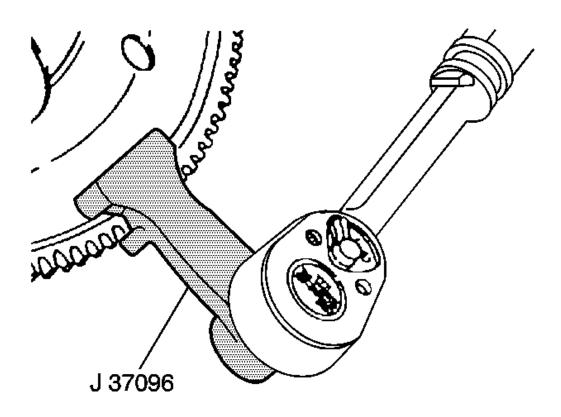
Holding Flywheel Courtesy of GENERAL MOTORS CORP.
